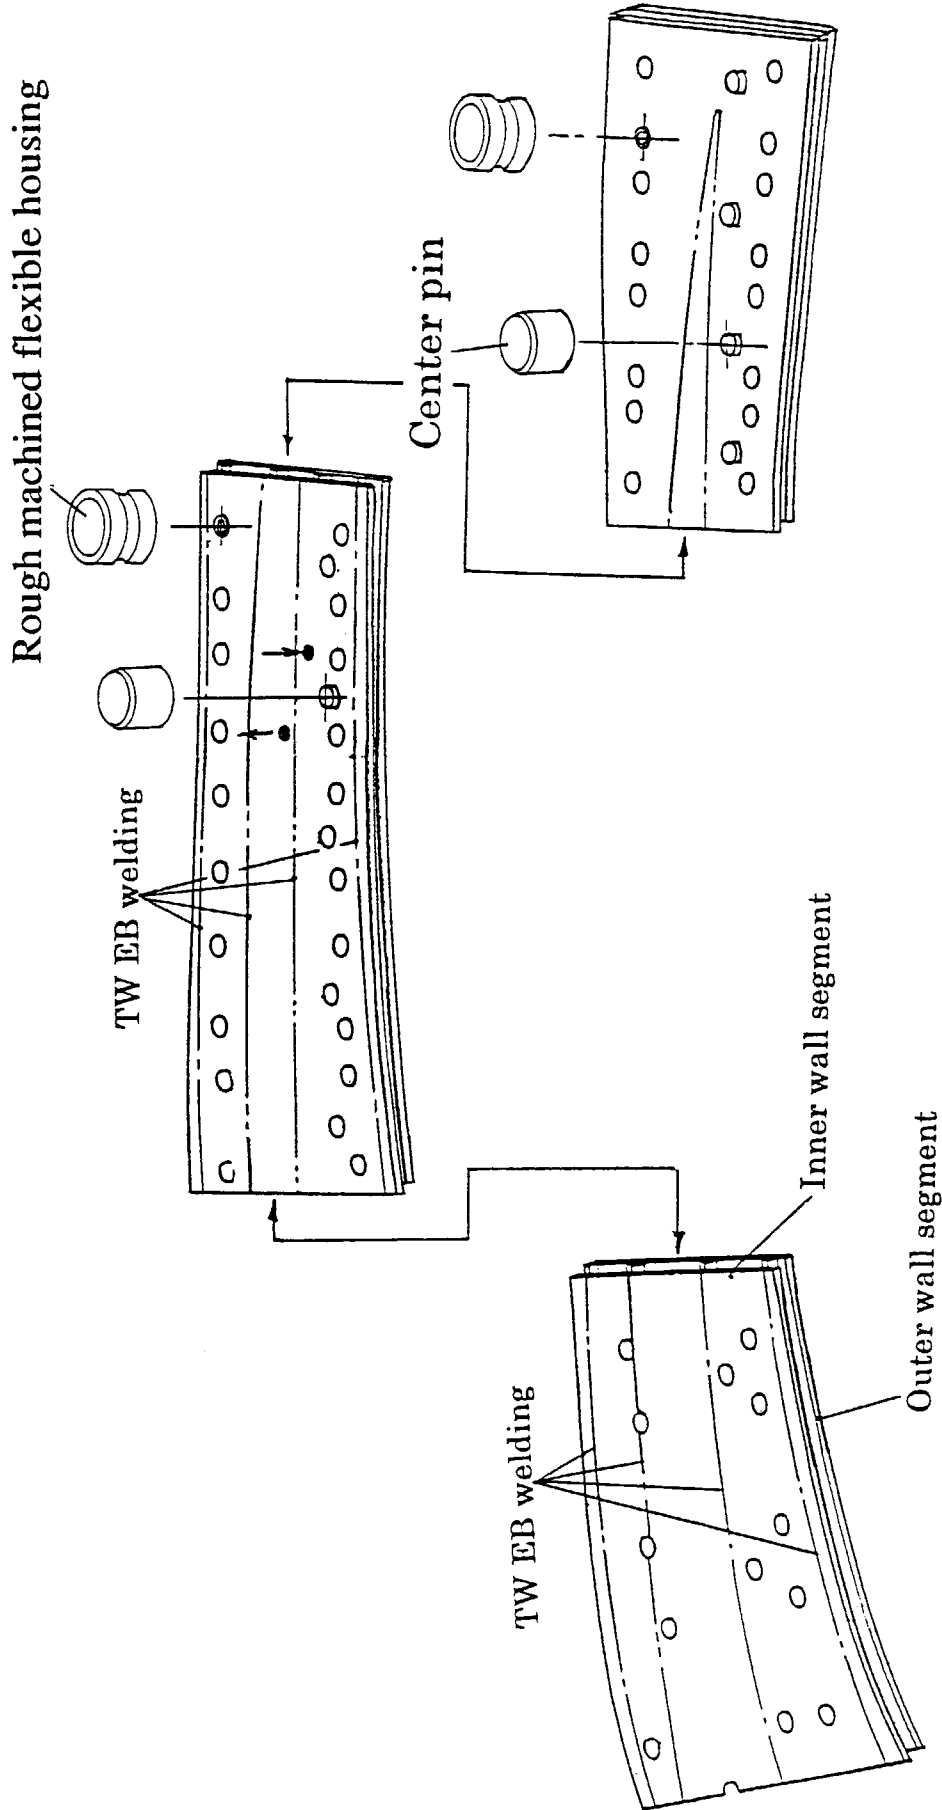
TW EB welding of outer wall to channel plate and
